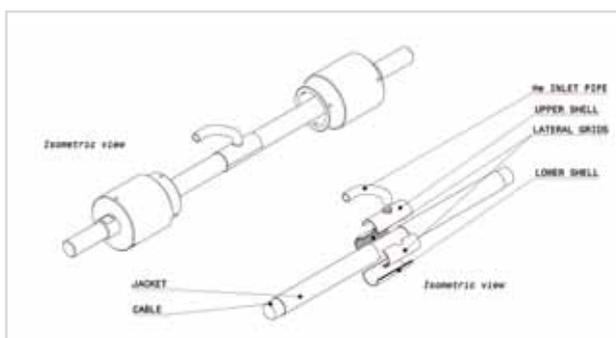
TF-He-Inlet equipped with mounting fixture for fatigue test in the CryoMaK laboratory.
